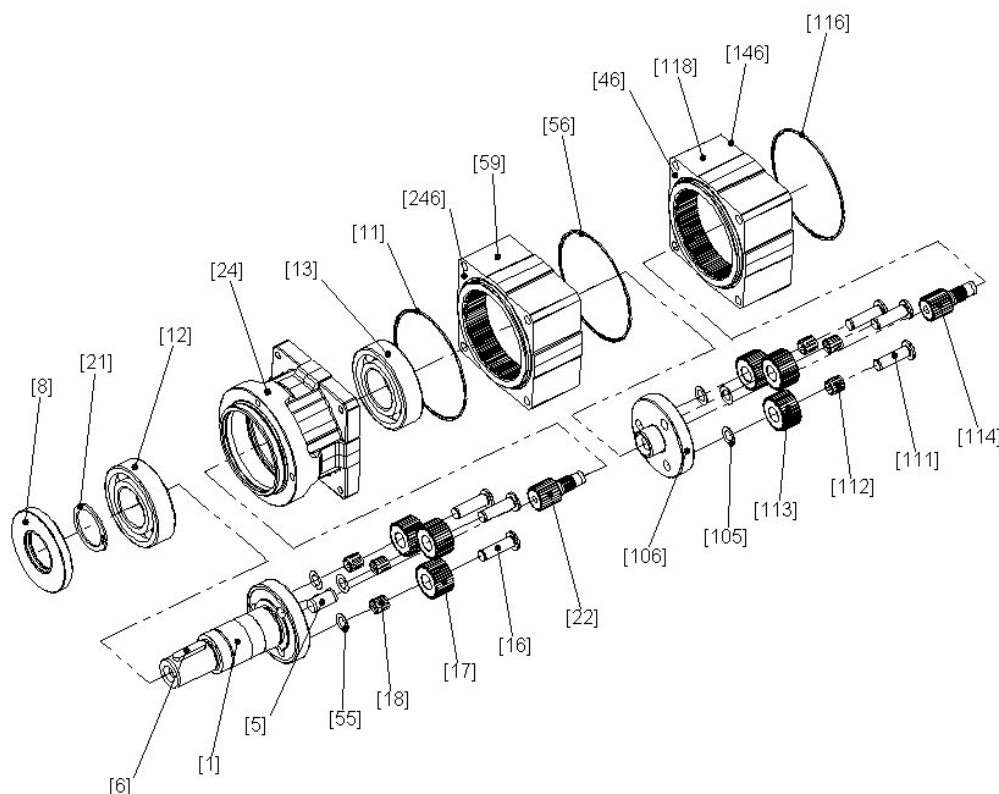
Basic design of a servo planetary gear unit PSKCZ122 to PSKCZ622
